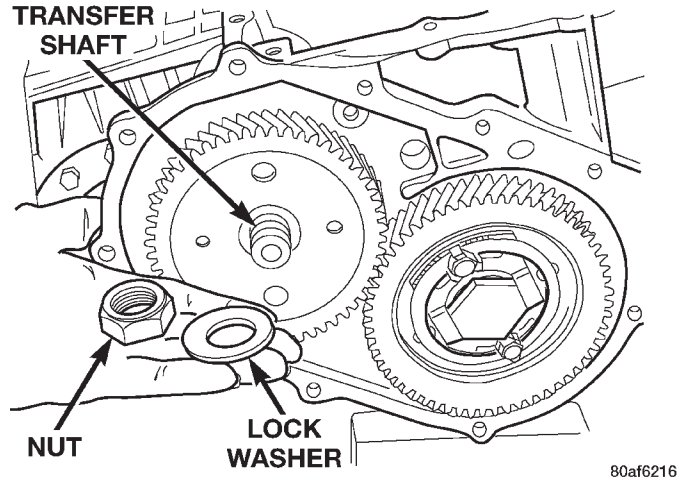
Transfer Shaft Gear Nut and Coned Washer
